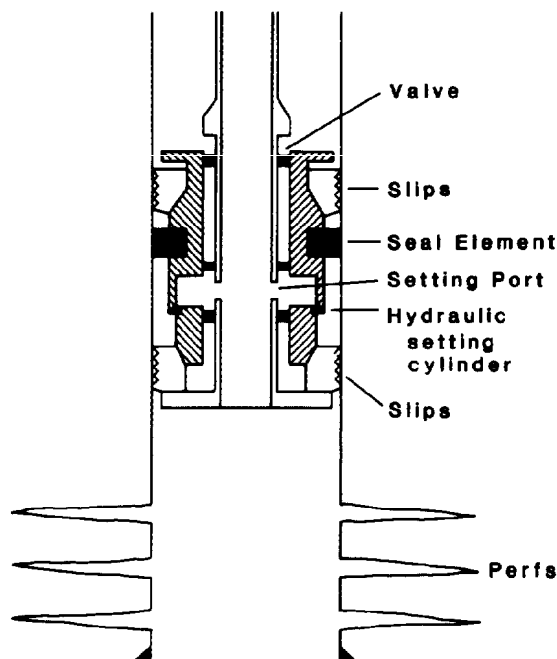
Hydraulic packer is set by tubing pressure.
